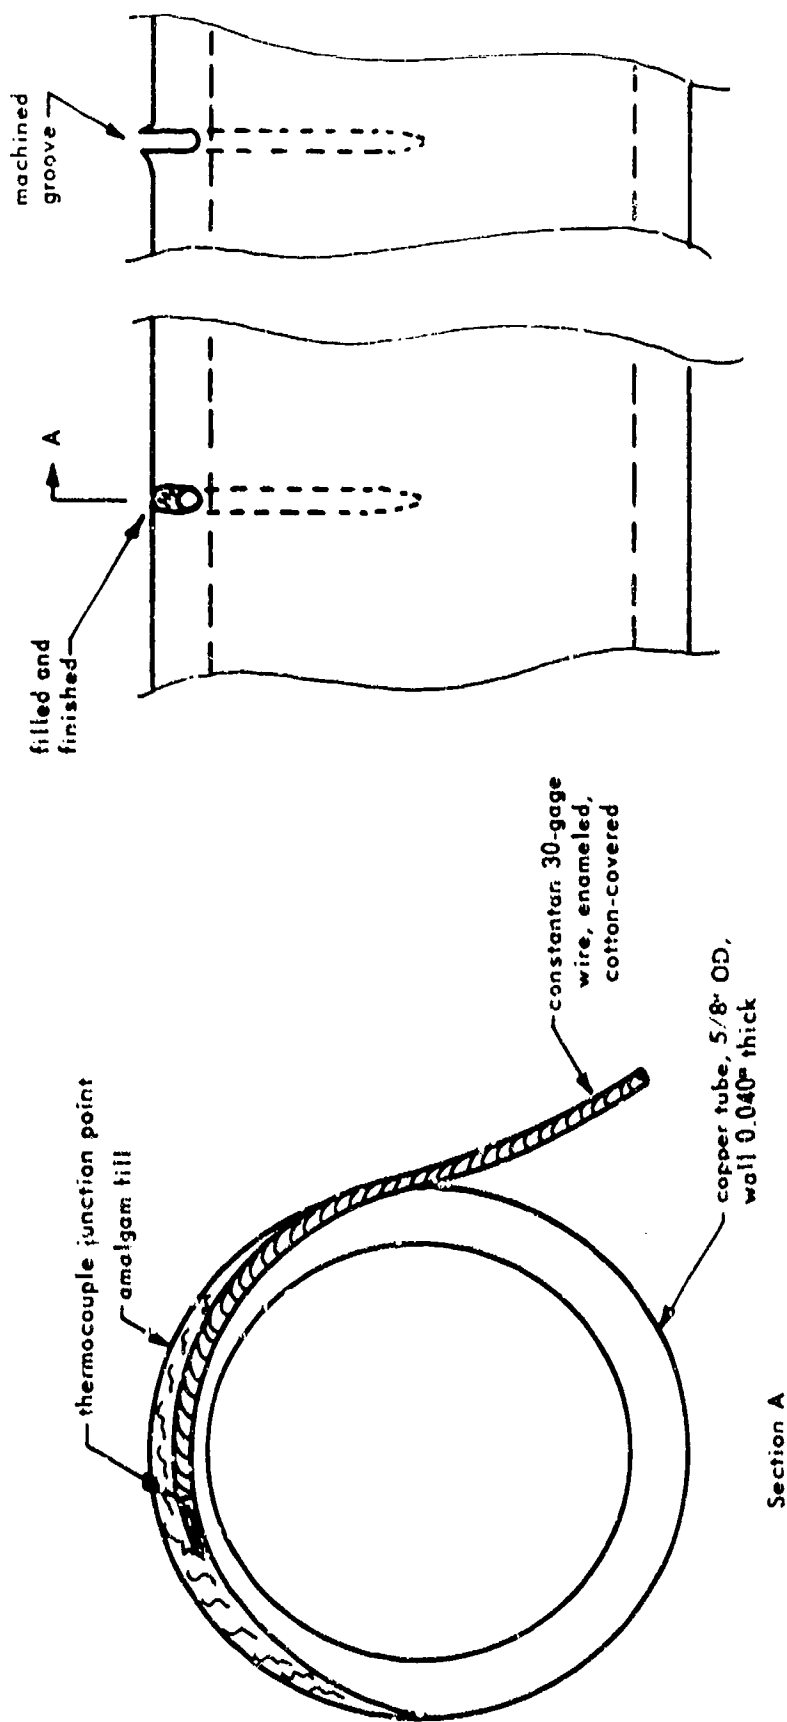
Method of installing thermocouples in tube wall of single-tube experiment.
